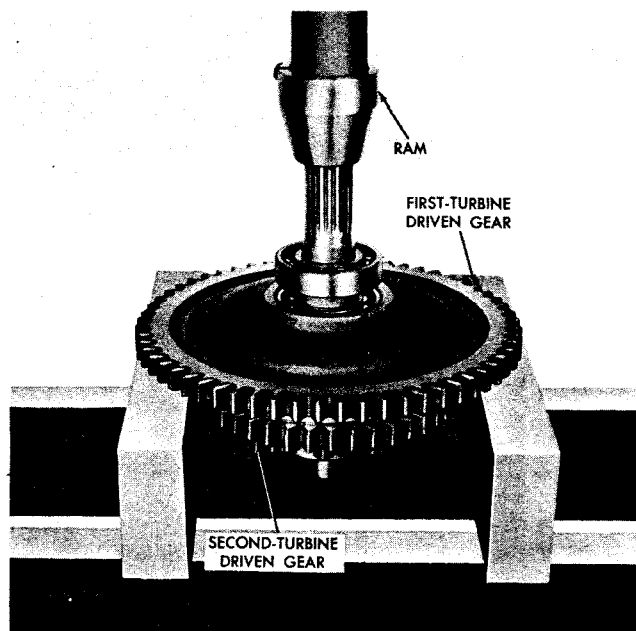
Pressing second-turbine driven gear and freewheel unit out of first-turbine driven gear
